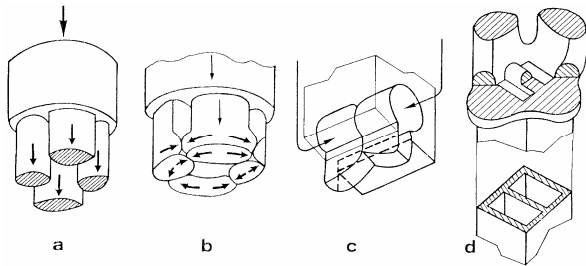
Successive steps in extrusion of hollow shape; a) into ports, b) filling the welding chamber, c) into the gap between the cores. d) extrusion of the hollow shape [2]
